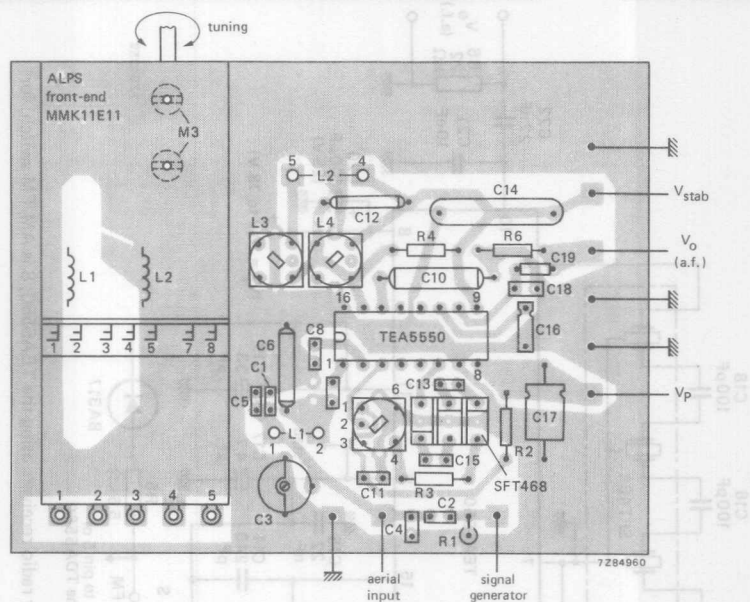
Printed-circuit board component side, showing component layout. For circuit diagram see Fig. 4.
